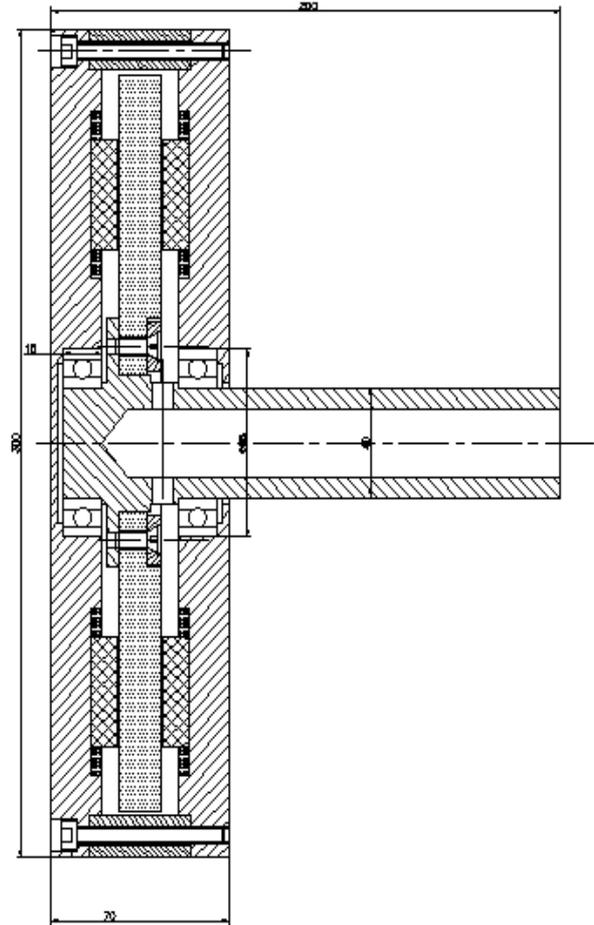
The final dimensions of the designed prototype of permanent magnet axial wind generator.
